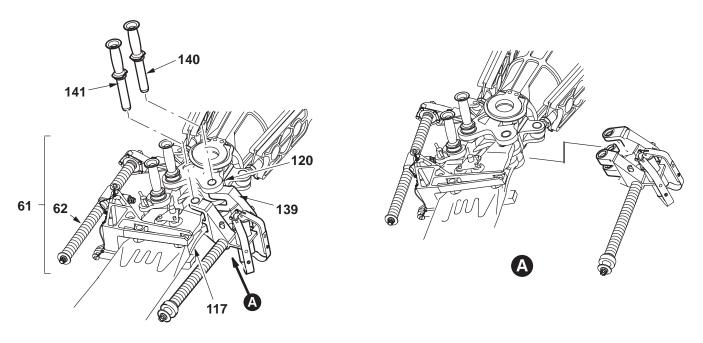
Installation of Handles on Blade Fold Pins In Swing Link Assembly
